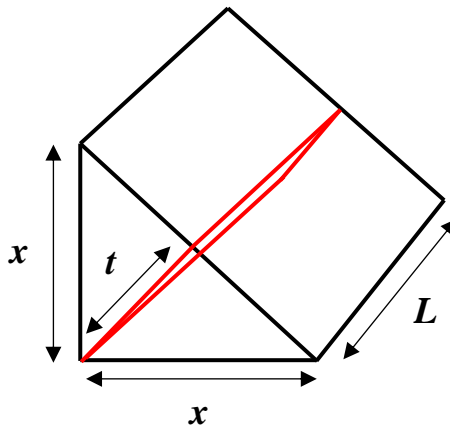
The dimension of one of the fillet welds together with cross-sectional area experiencing the force.
